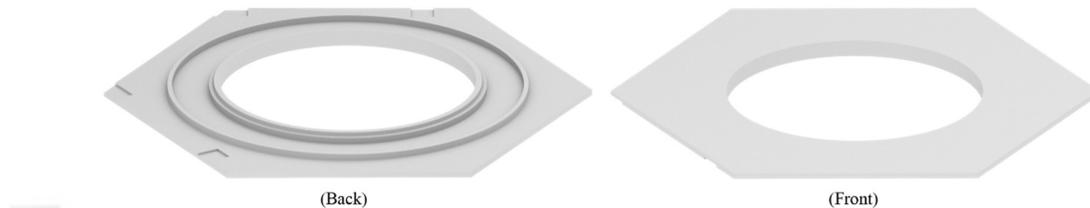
Back and front views from a unit of the frontal hexagon.
